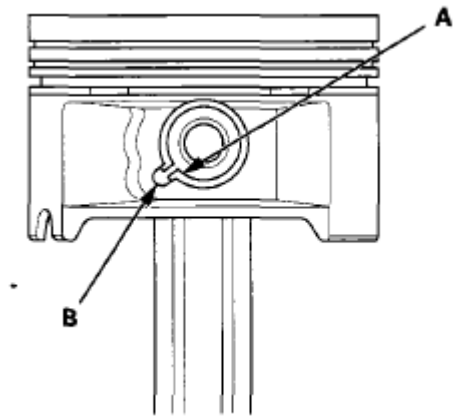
Identifying Piston Pin Snap Rings And Piston Pin Bores
